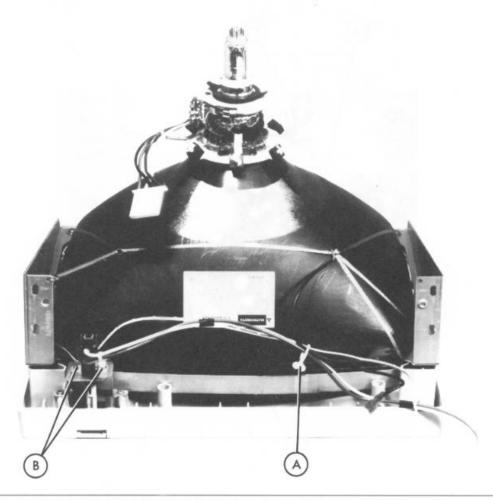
POWER SWITCH REMOVAL/REPLACEMENT
